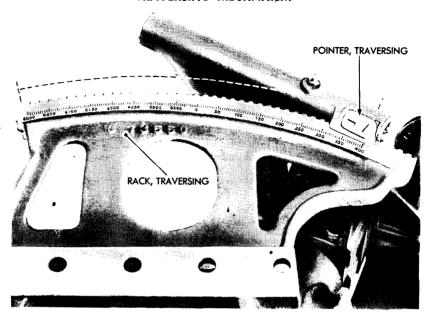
Auxiliary Shield Removed, Preparatory to Removing
